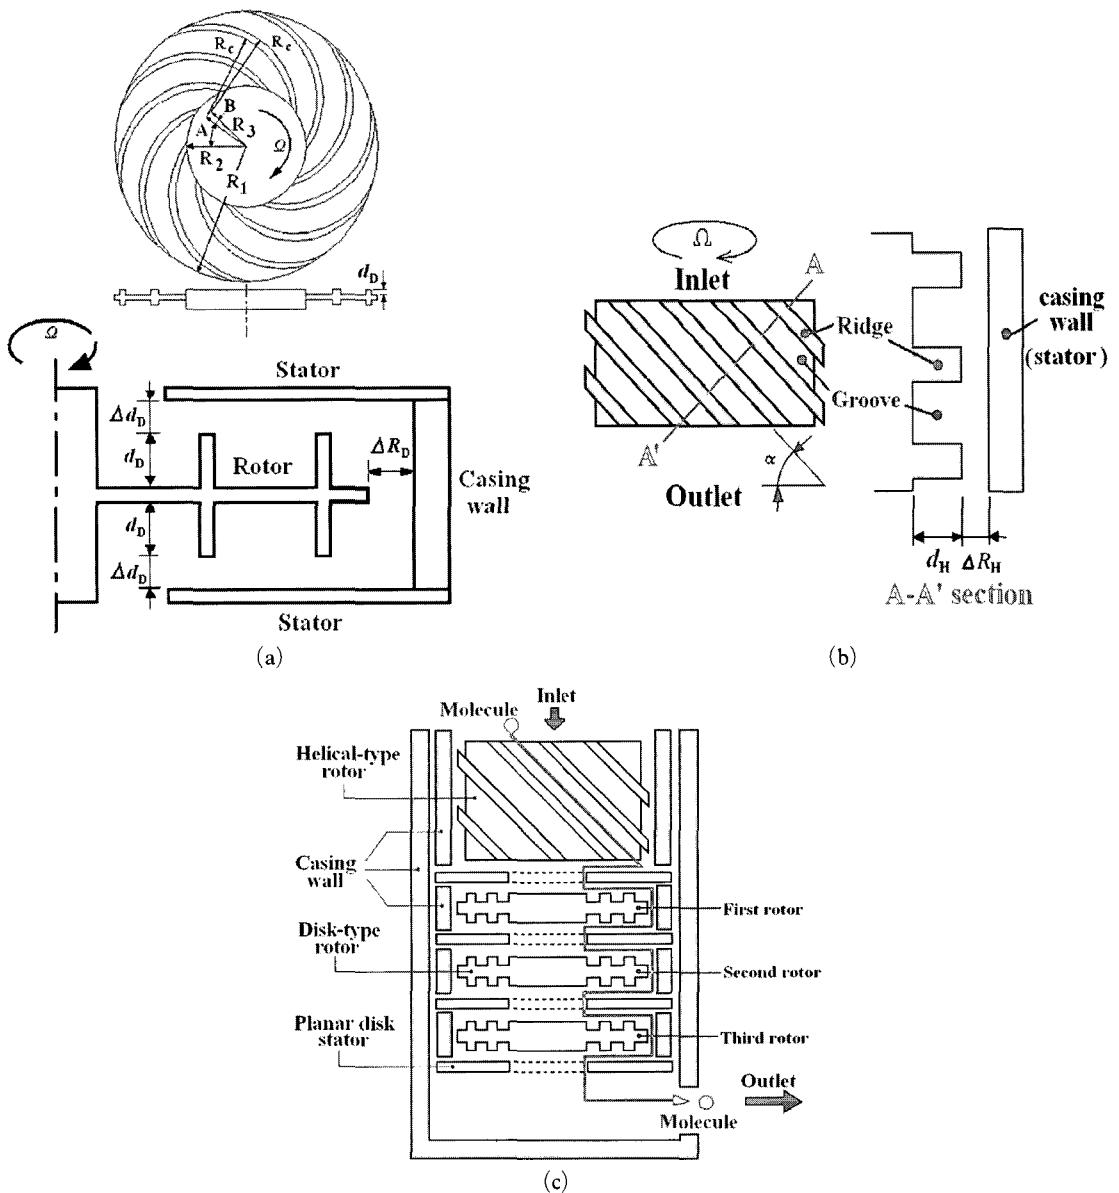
Geometry of molecular drag pumps : (a) DTDP rotor, (b) HTDP rotor and (c) cross-section of CDP
